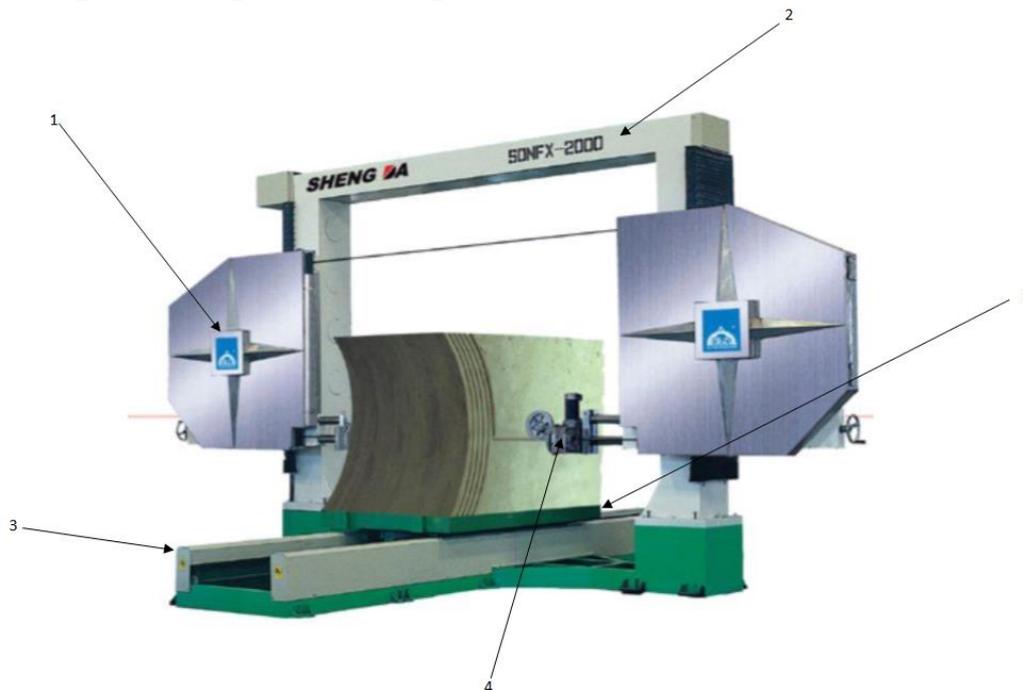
Machine for abrasive cutting of stone with a reinforced rope: 1 – wheel with one electric motor; 2 – machine frame with toothed guides; 3 – bed with toothed guides for the table; 4 – device for finally tightening the reinforced cable; 5 – table
